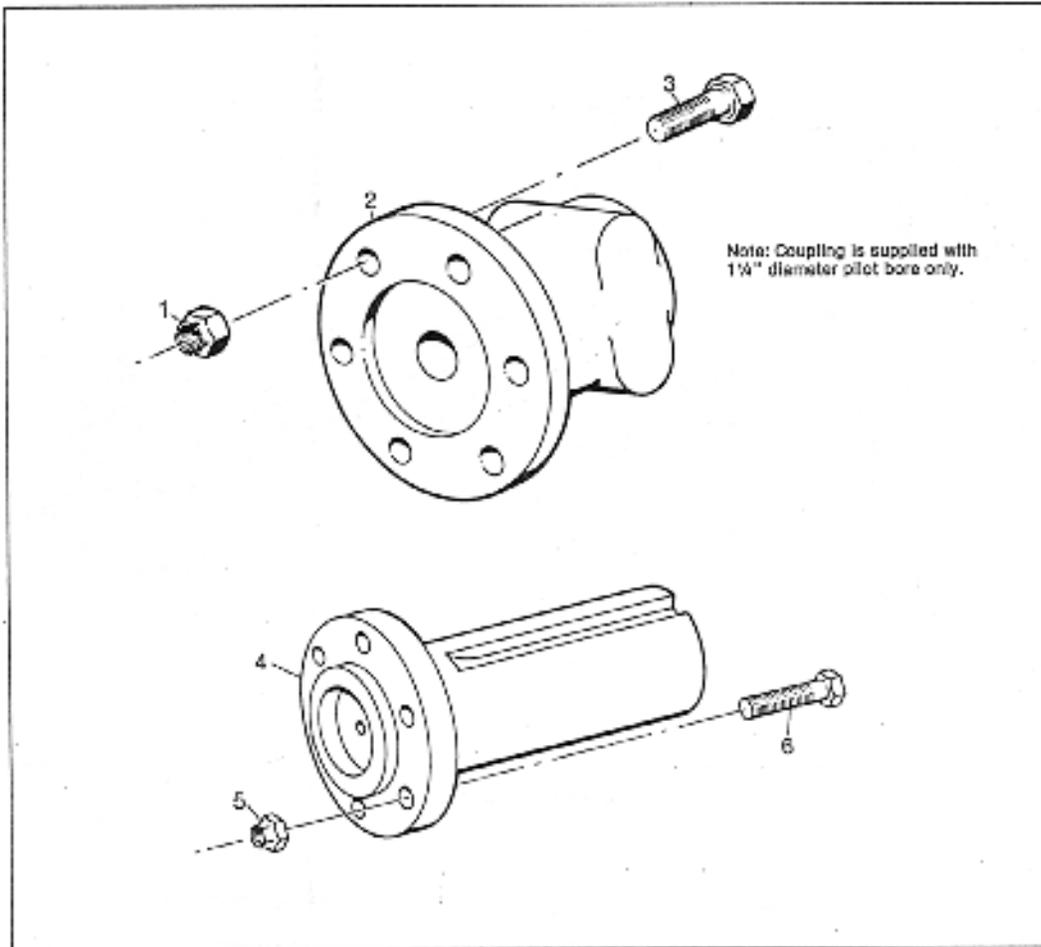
Propeller Flange Coupling and Keyed Shaft Kits.
